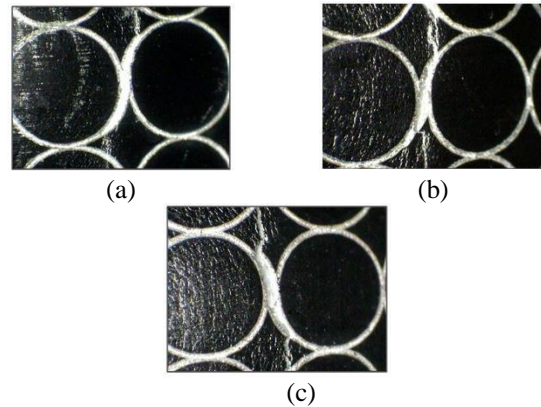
Failure Locations for laser marking during Erichsen test method: a) 0.5 mm thick blank; b) 1.0 mm thick blank; c) 1.6 mm thick blank
